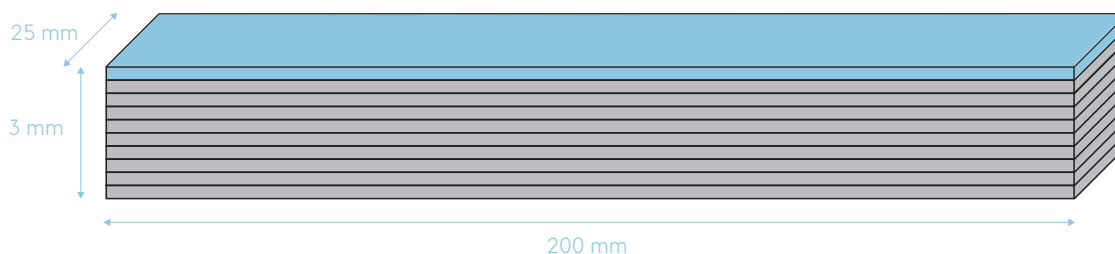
Geometry of test specimens for the testing of adhesion in the floating roller test
